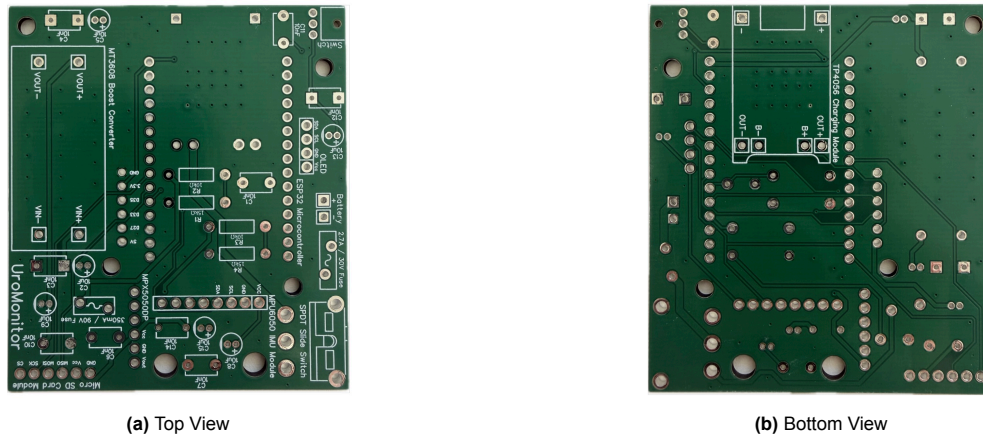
Fabricated UroMonitor PCB: top (left) and bottom (right) views of the manufactured board prior to component population.
